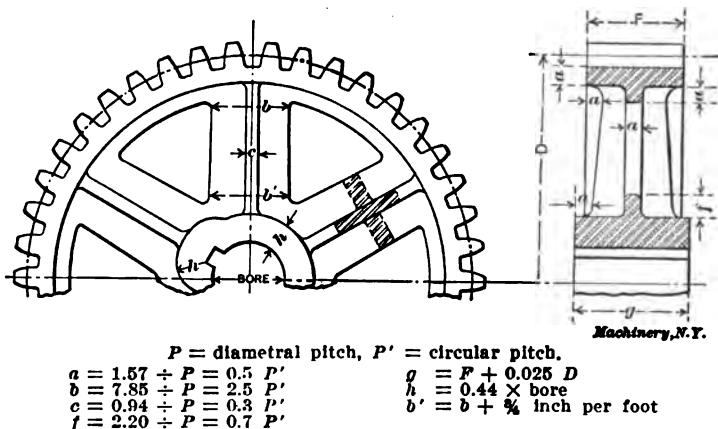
Dimensions of Spur Gears with Ribbed Arms
